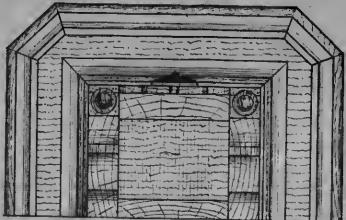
Underneath Plan of Oak Wall Bracket.
